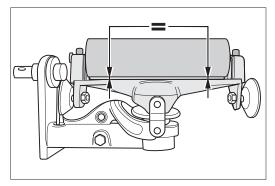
the tensioning roller is positioned parallel to the top of the drive unit.
